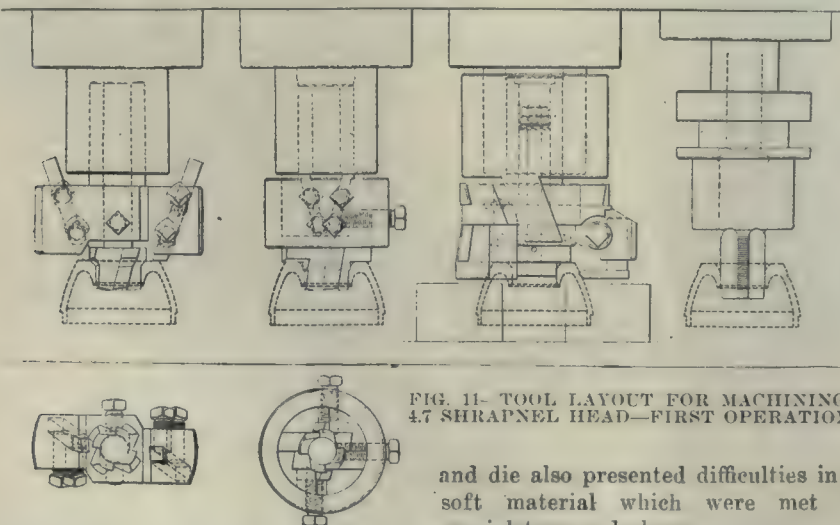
TOOL LAYOUT FOR MACHINING 4.7 SHRAPNEL HEAD—FIRST OPERATION.
